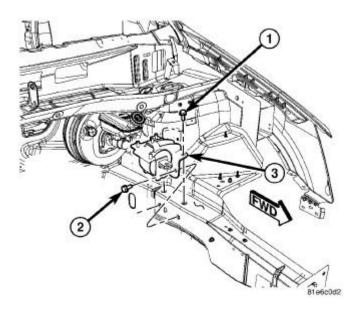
Left Engine Mount Courtesy of CHRYSLER LLC
